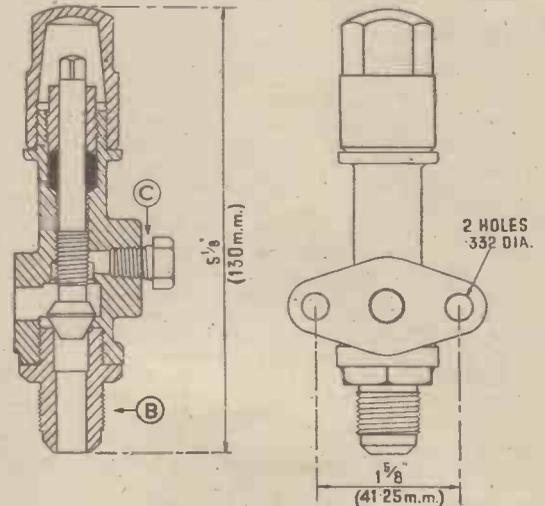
Compressor service valve. (By courtesy of British Thermostat, Ltd.)
